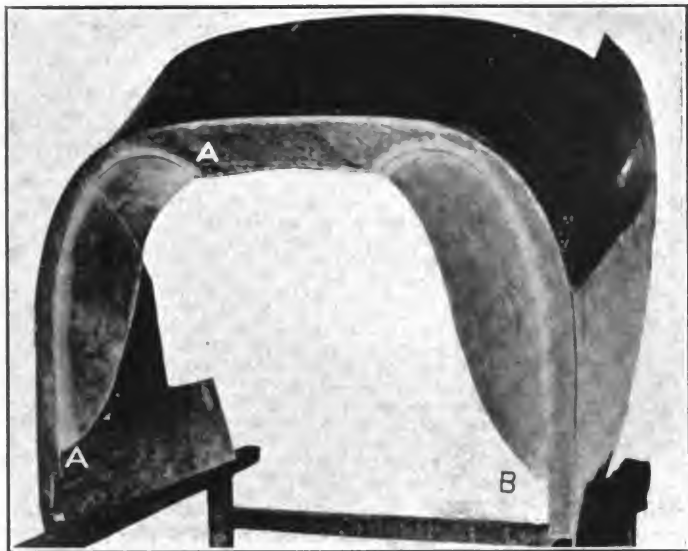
The cowl with front panels welded in place at A and B in seven minutes
